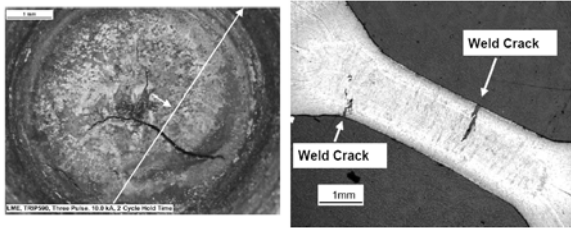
Weld indentation and metallographic cross section of GA TRIP590 steel
